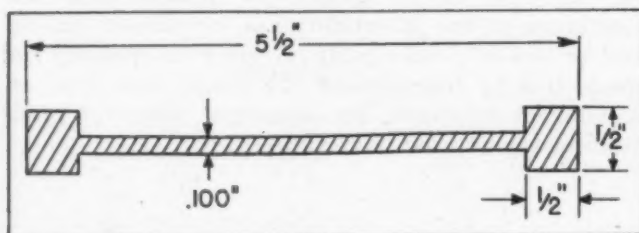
Above—Long, thin-section design of casting results in some warpage
